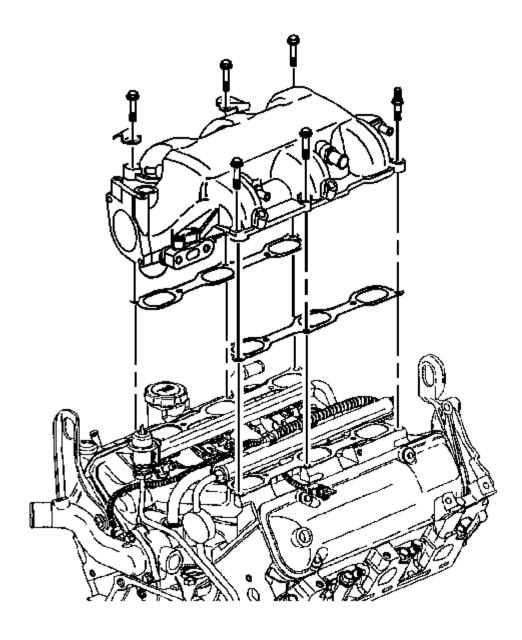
Removing Upper Intake Manifold & Gaskets Courtesy of GENERAL MOTORS CORP.
